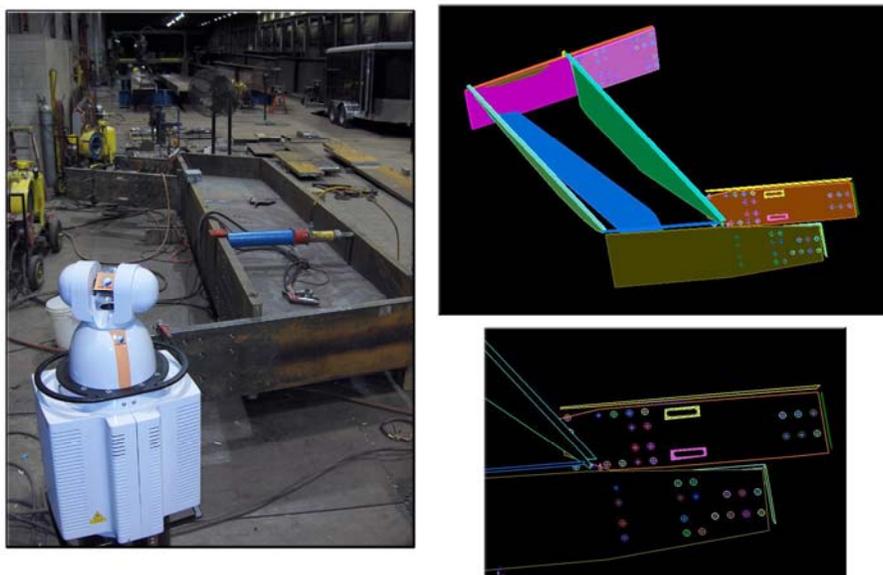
Complex geometry specimen showing hole and slot measurements.
